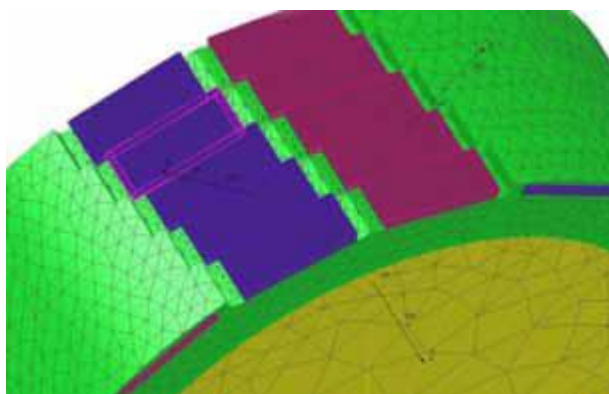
Sectioned rotor highlighting skewed buried magnets [10]
